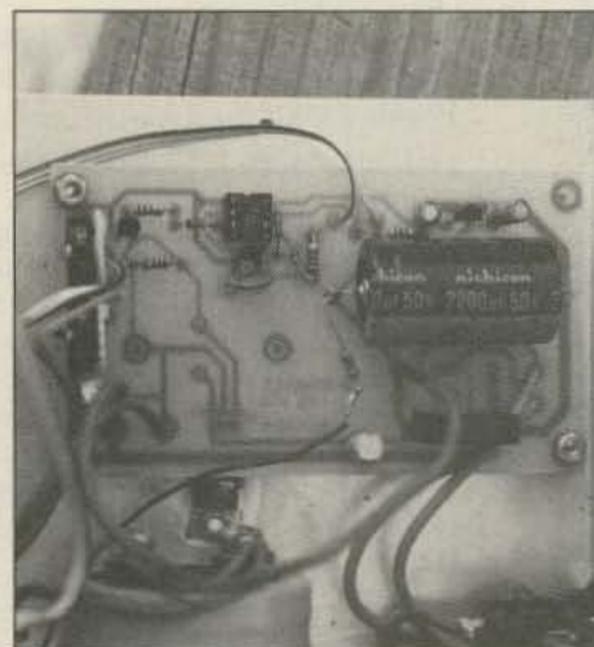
Photo B. Prototype PC board used in charger. Note the extra resistor soldered to the capacitor. Now the resistor is on the board. Just under the larger capacitor, the LM317 is bolted to the metal chassis.
